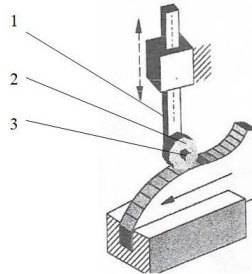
The assembly consisting of the translating cam and the translating tach with roller
